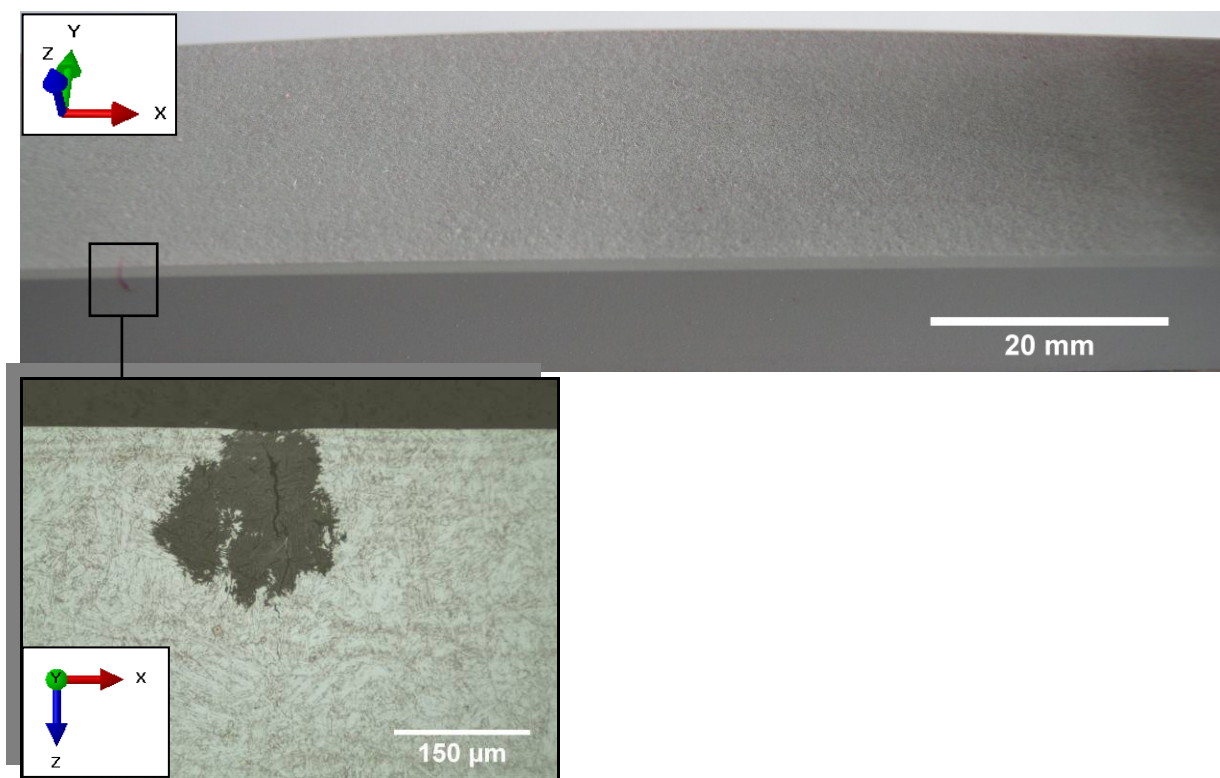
Single SSC crack located on the chamfered edge of as-received specimen P1 (24 °C). No cracks were observed where the original pipe surface remained intact
